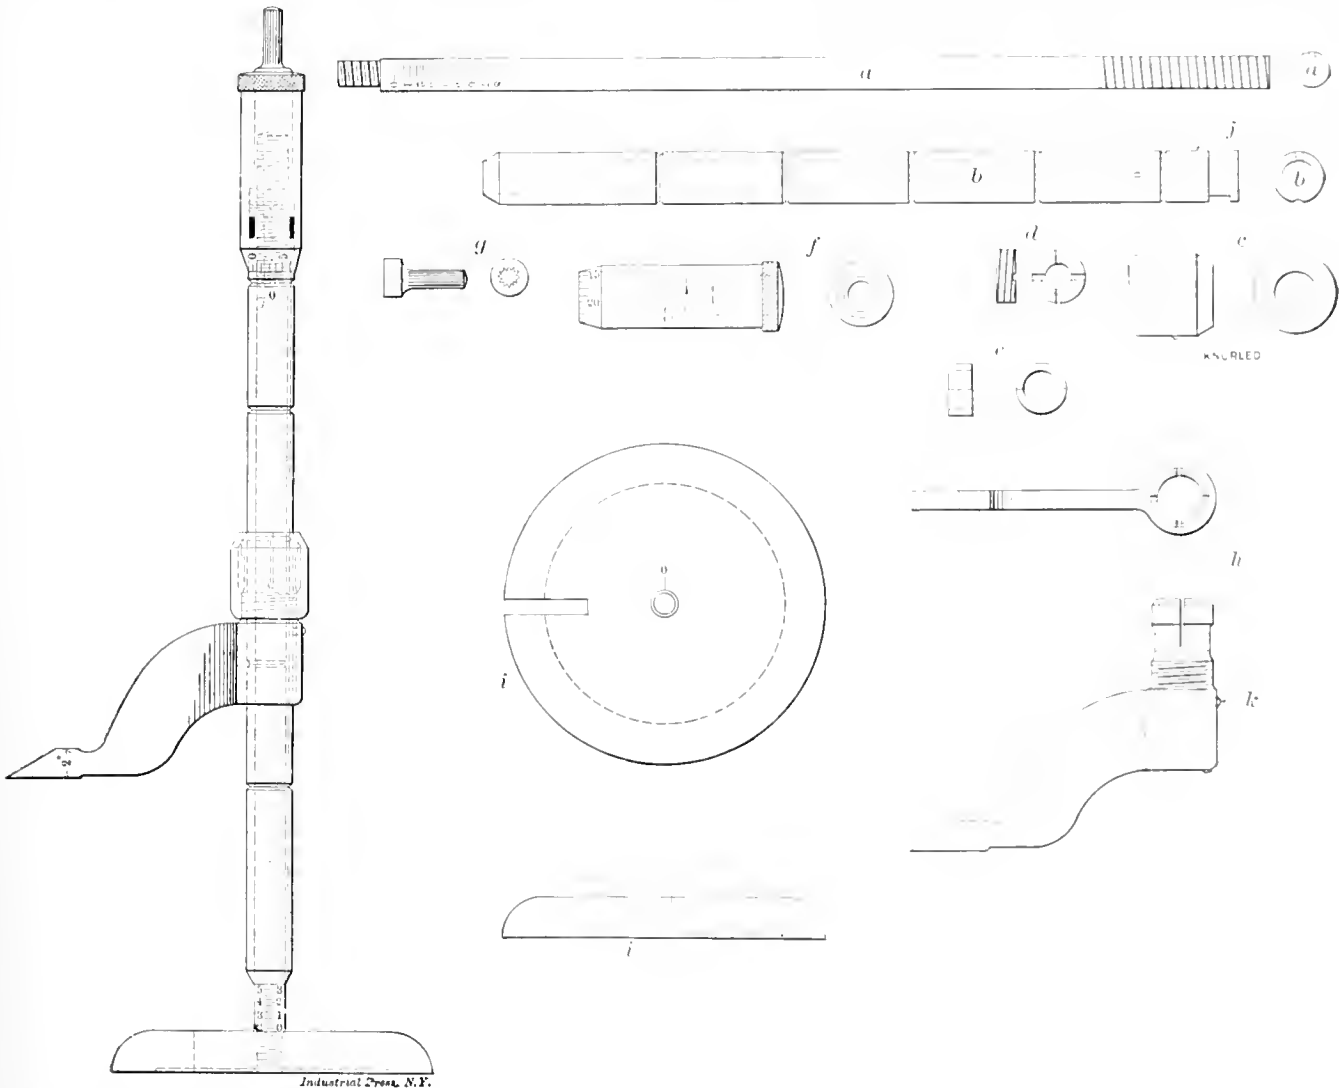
Assembled View and Details of 5-inch Micrometer Surface Gage. The Spindle and Micrometer parts are used in other Combinations shown in the following Views.
